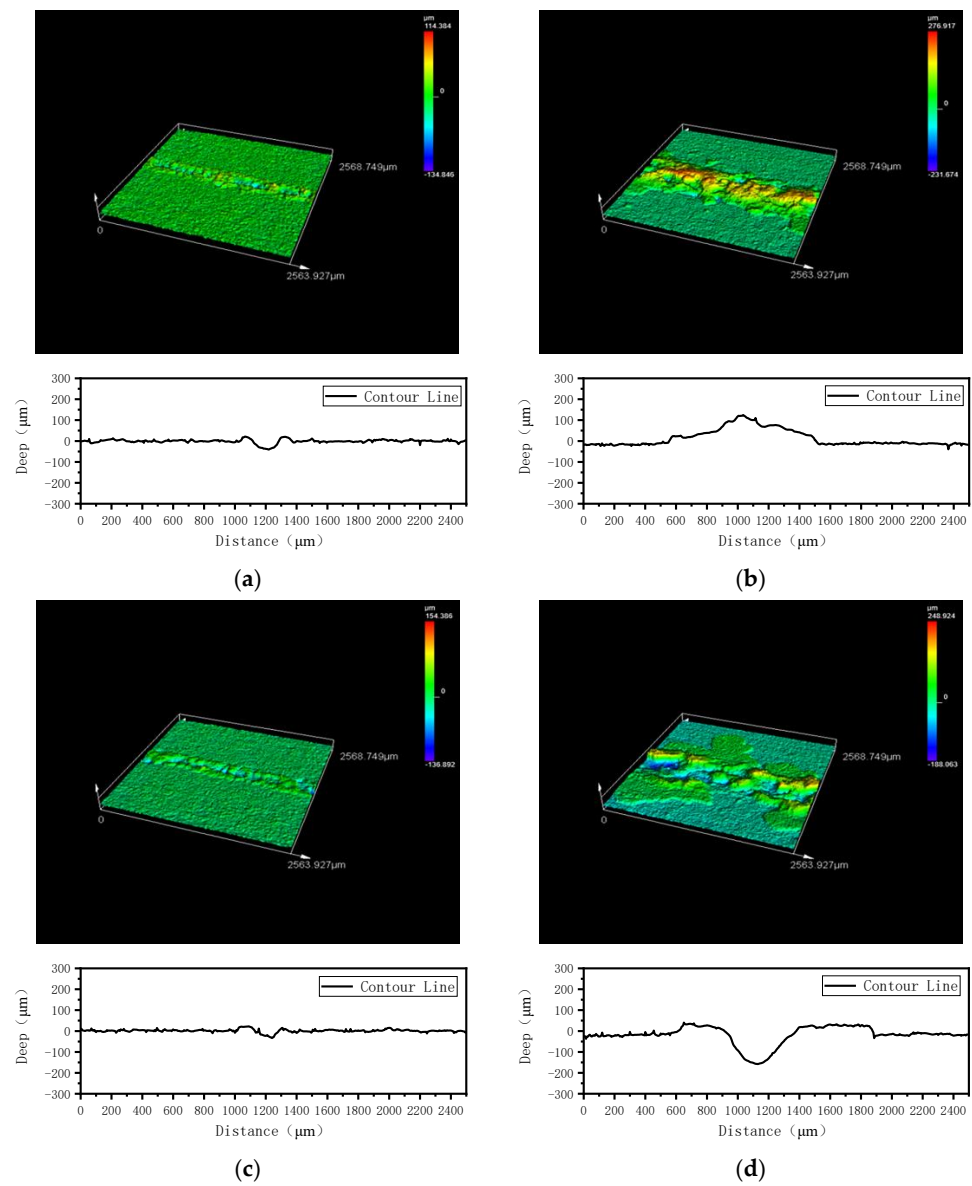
3D morphology and contour curves of metal and glass side fractures after shear testing of welded samples with different laser process parameters. (a) Laser power 150 W. Frequency 10 Hz. (b) Laser power 300 W. Frequency 10 Hz. (c) Laser power 250 W. Frequency 8 Hz. (d) Laser power 250 W. Frequency 14 Hz.
